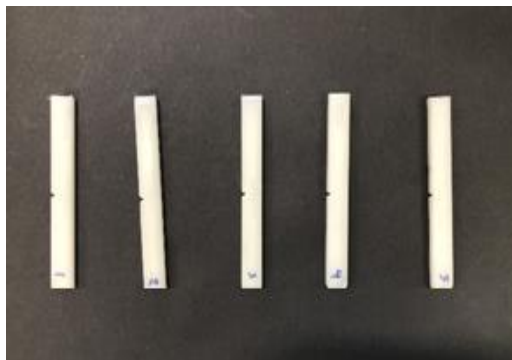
Notched testing specimens for Izod impact testing from injection moulding (Negri Bossi)
